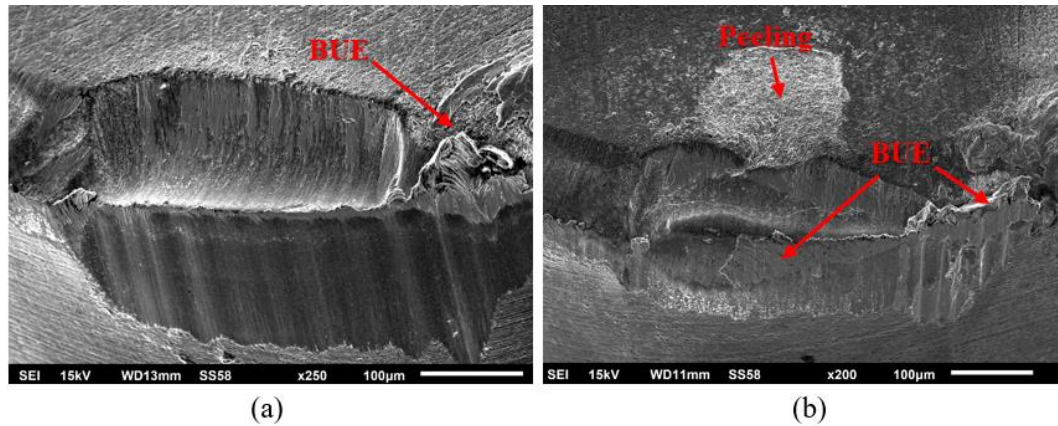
Worn rake and flank faces of ceramic insert after cutting (a) T1 steel to 3304 m, and (b) D2 steel to 3468 m.
